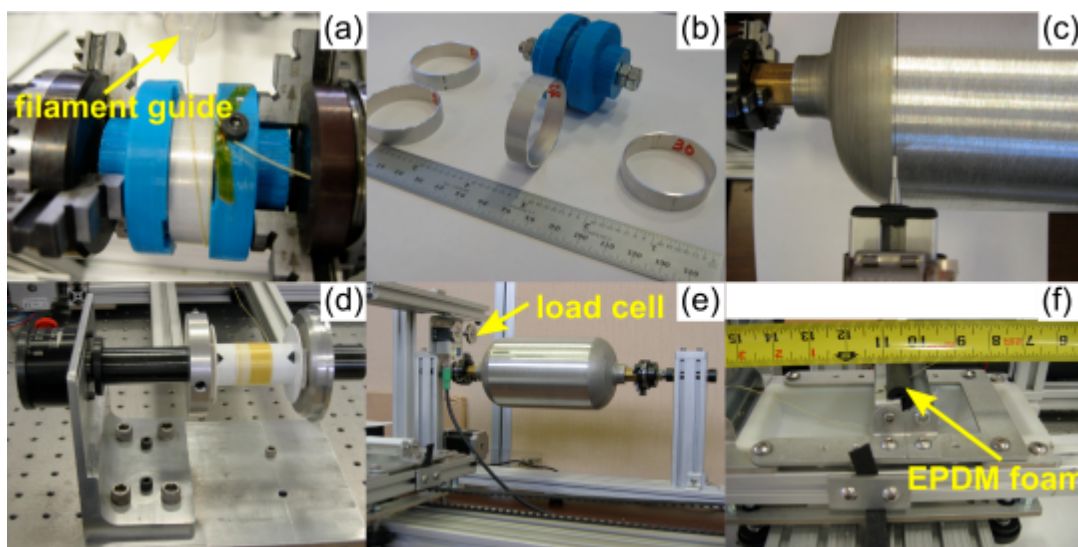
The key modifications made to a commercial desktop filament winder to enable winding of CNT yarns include (a) chucks to hold various work pieces and a custom wet winding filament guide, (b) a 3D printed Al ring holding fixture, (c) a dry winding filament guide, (d) a tension control brake and yarn feeder, (e) tension measuring load cells and (f) a resin metering foam element.
